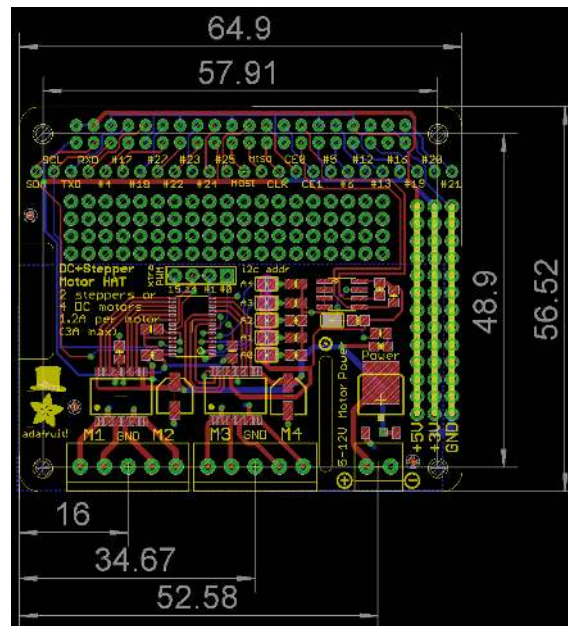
DC Motor Hat Layout (Source: Adafruit Industries [adafruit'industries:dchat])
